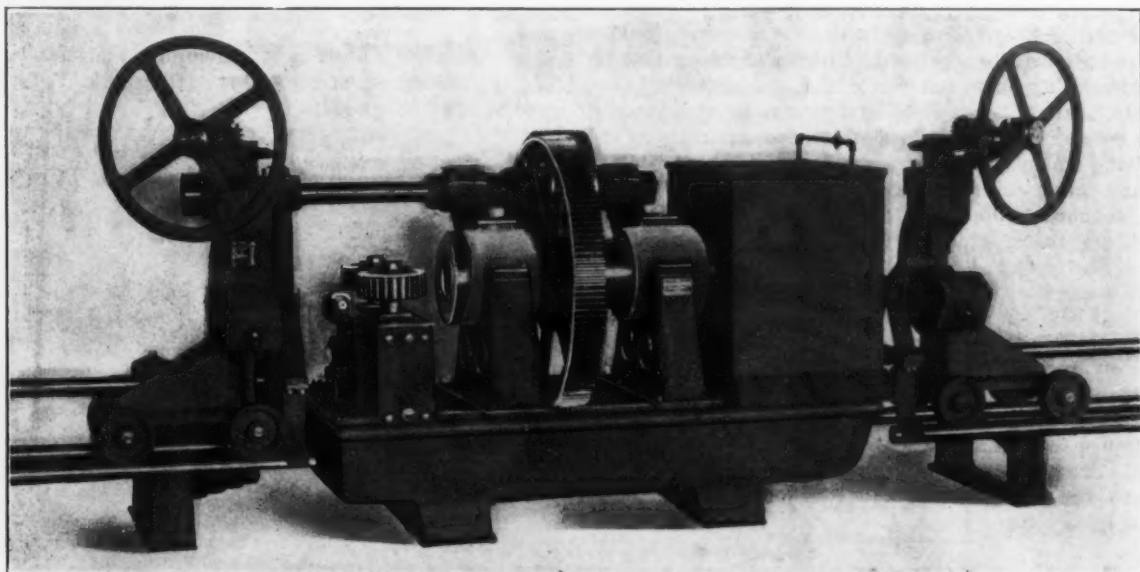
Turning Machine for Shafting. Built by the Brightman Mfg. Company, Shelby, Ohio.
